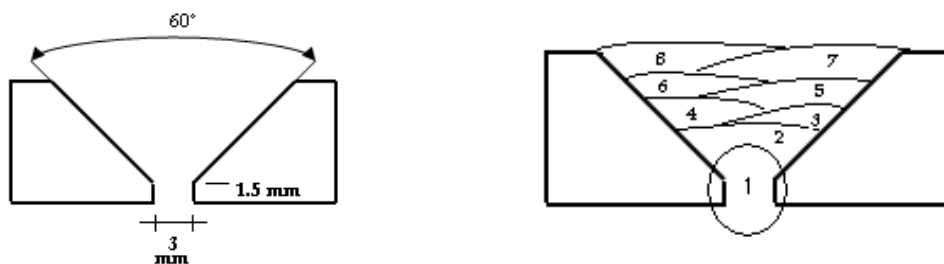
Weld preparation and weld sequence for the X70 FCAW butt joints
